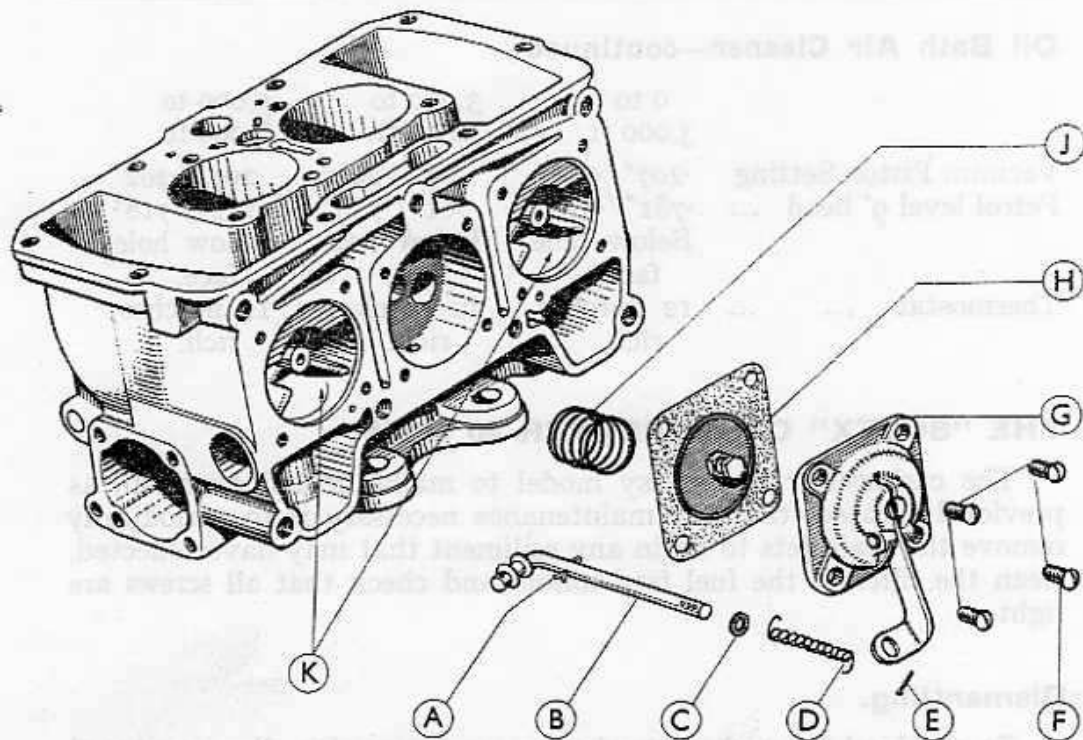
RE-ASSEMBLING PUMP ASSEMBLY.
